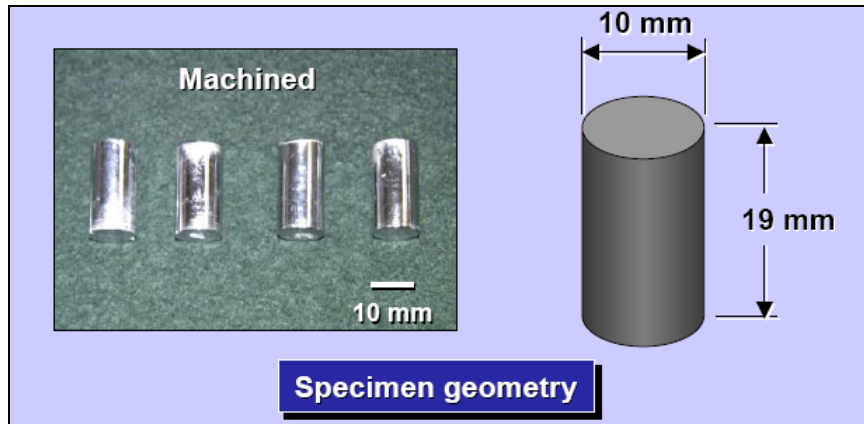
Machined Cylindrical Solder Specimen for Compression Testing [61].
